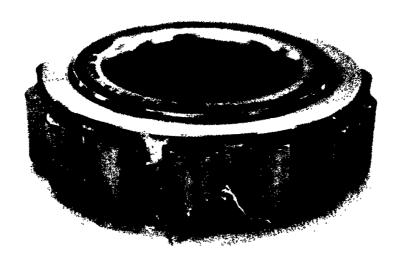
Bearing B-9, S/N i450 -- Inner Race, Cage, and Rollers
